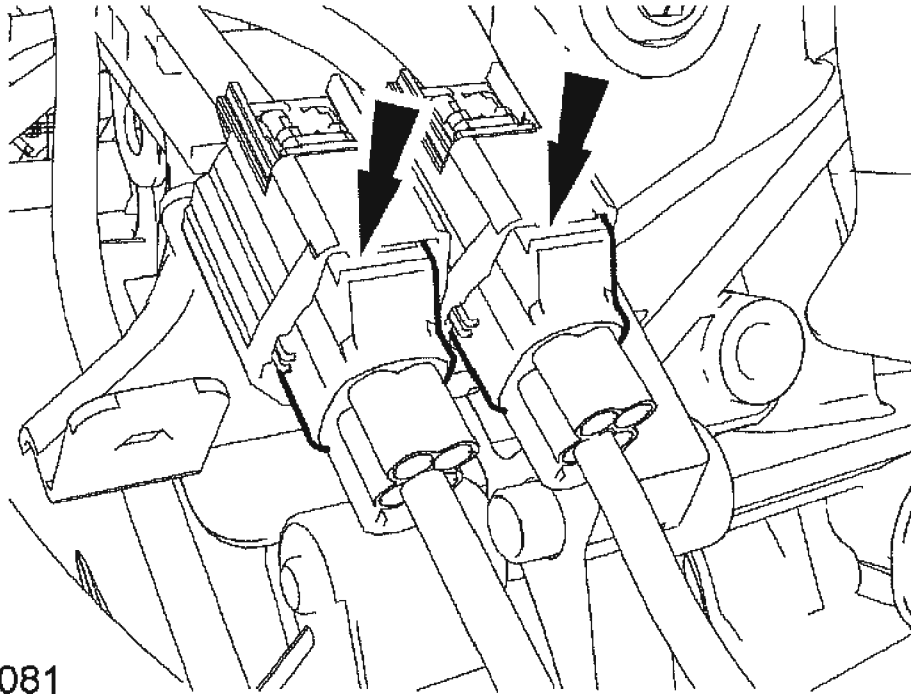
Disconnecting Exhaust Sensor Electrical Connectors
